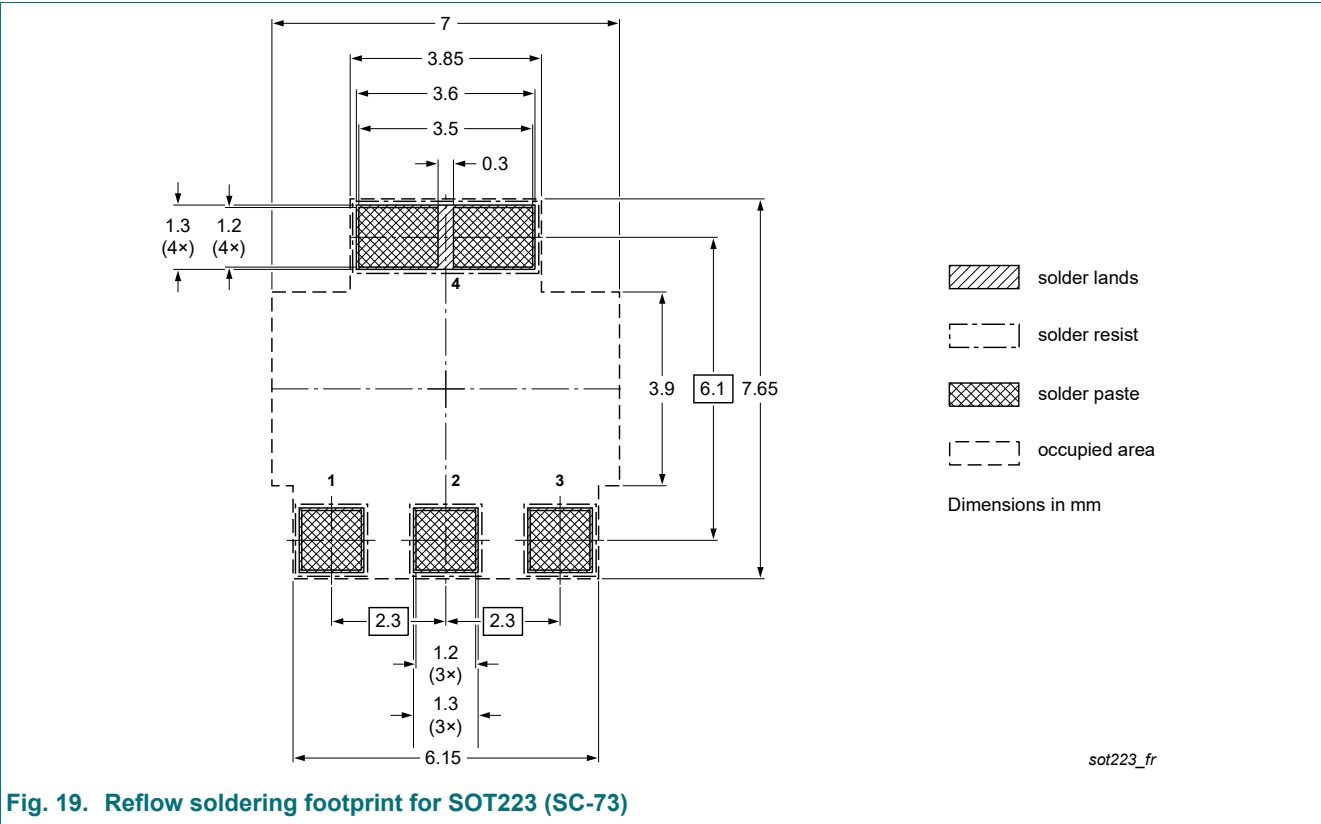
Reflow soldering footprint for SOT223 (SC-73)
